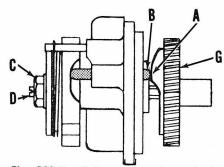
Refer to text for adjusting pump stroke. Cam (A) is part of gear (G).
